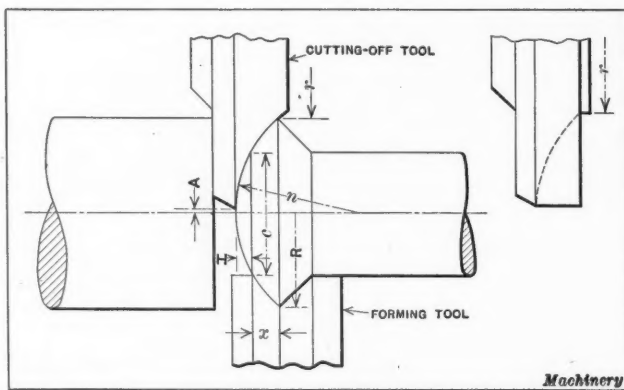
Forming and Cutting-off Tools for forming a Spherical End on Screw-head
